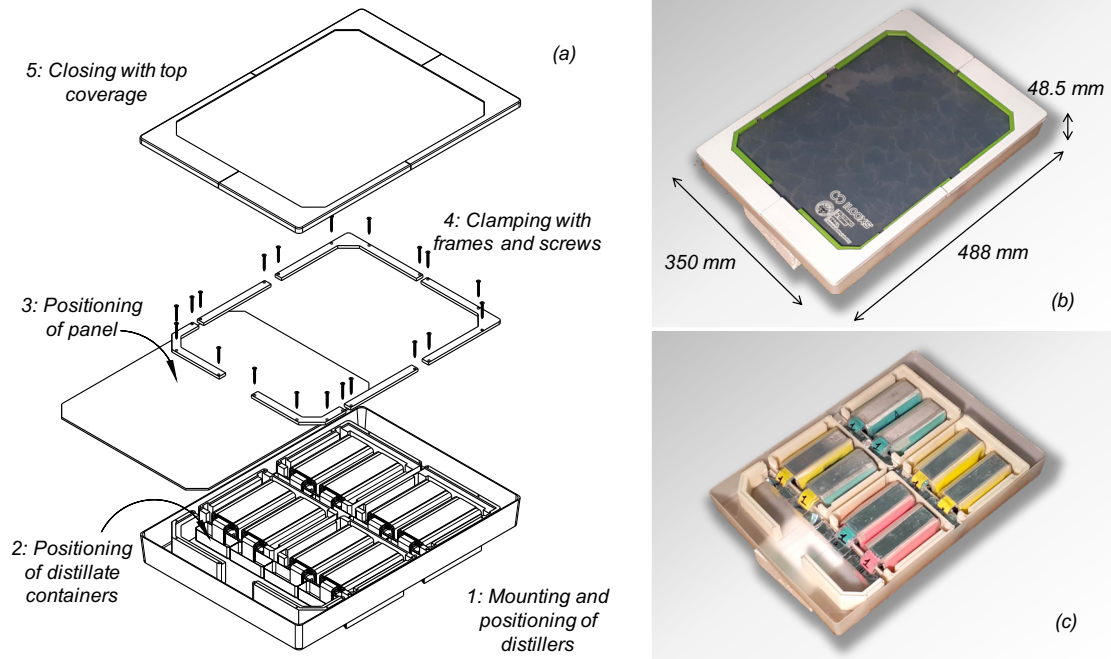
Integrated solution: passive 3-stage distillers and camouflaged PV module. (a) Exploded view with mounting operations; pictures of (b) closed and (c) open configuration. In panel (c), the four sectors in which the eight distillers are fitted can be distinguished. In detail, each sector hosts two distillers. This design is conceived to maximize the contact between the back surface of the PV and the top face of distillers.
